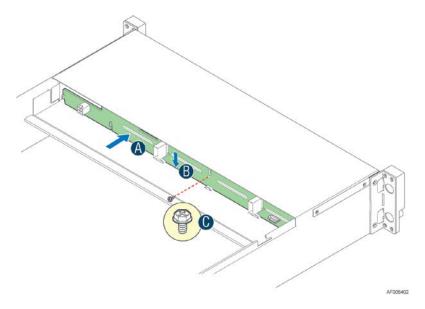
2.5" Drive Hot-Swap Backplane Assembly
